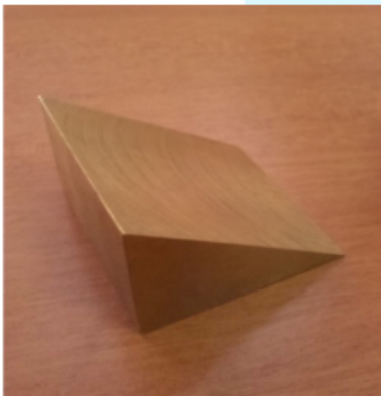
Brass Specimen with 90° and 60° Edges.
